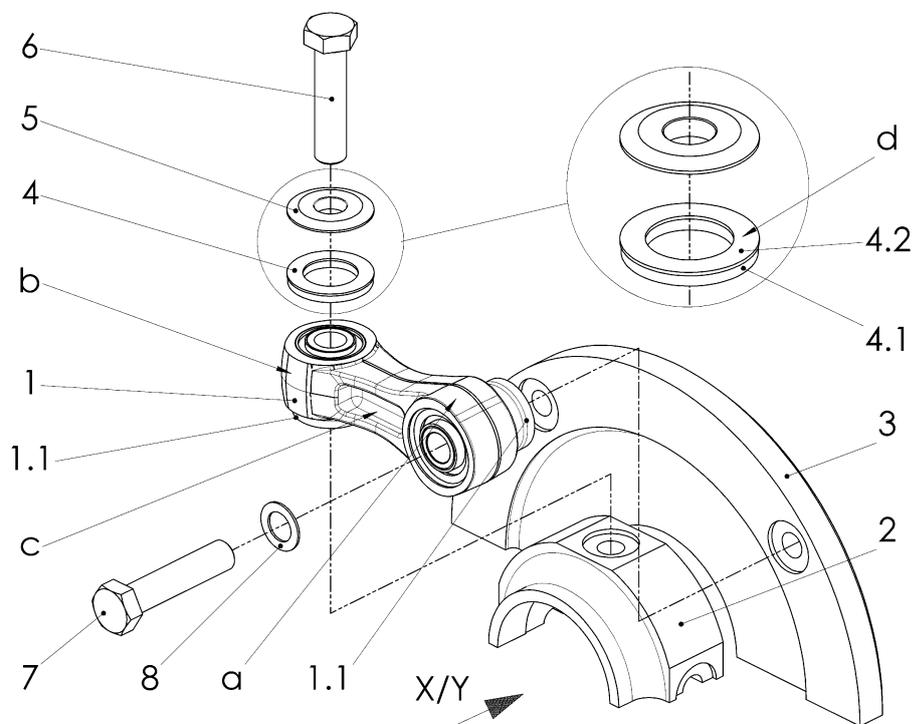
Mounting the links ("cw" clockwise rotation)
